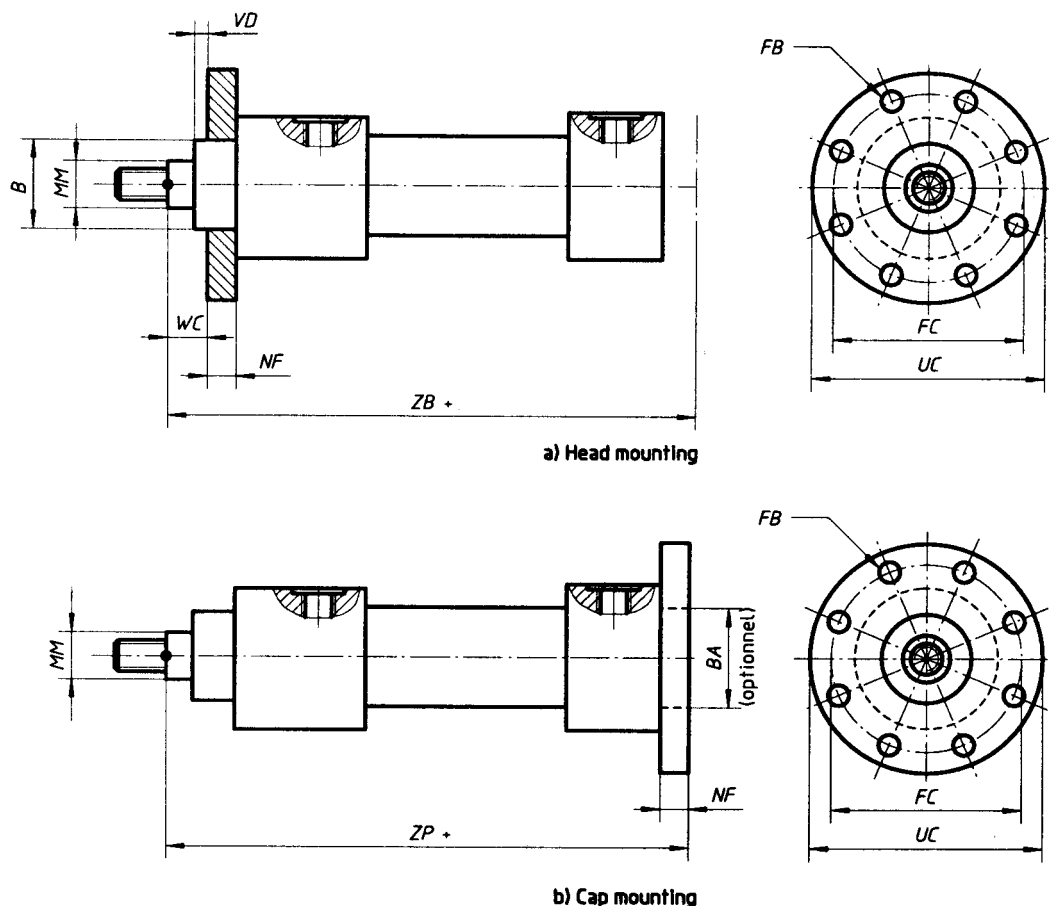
MF3 — Head circular flange mounting and MF4 — Cap circular flange mounting
